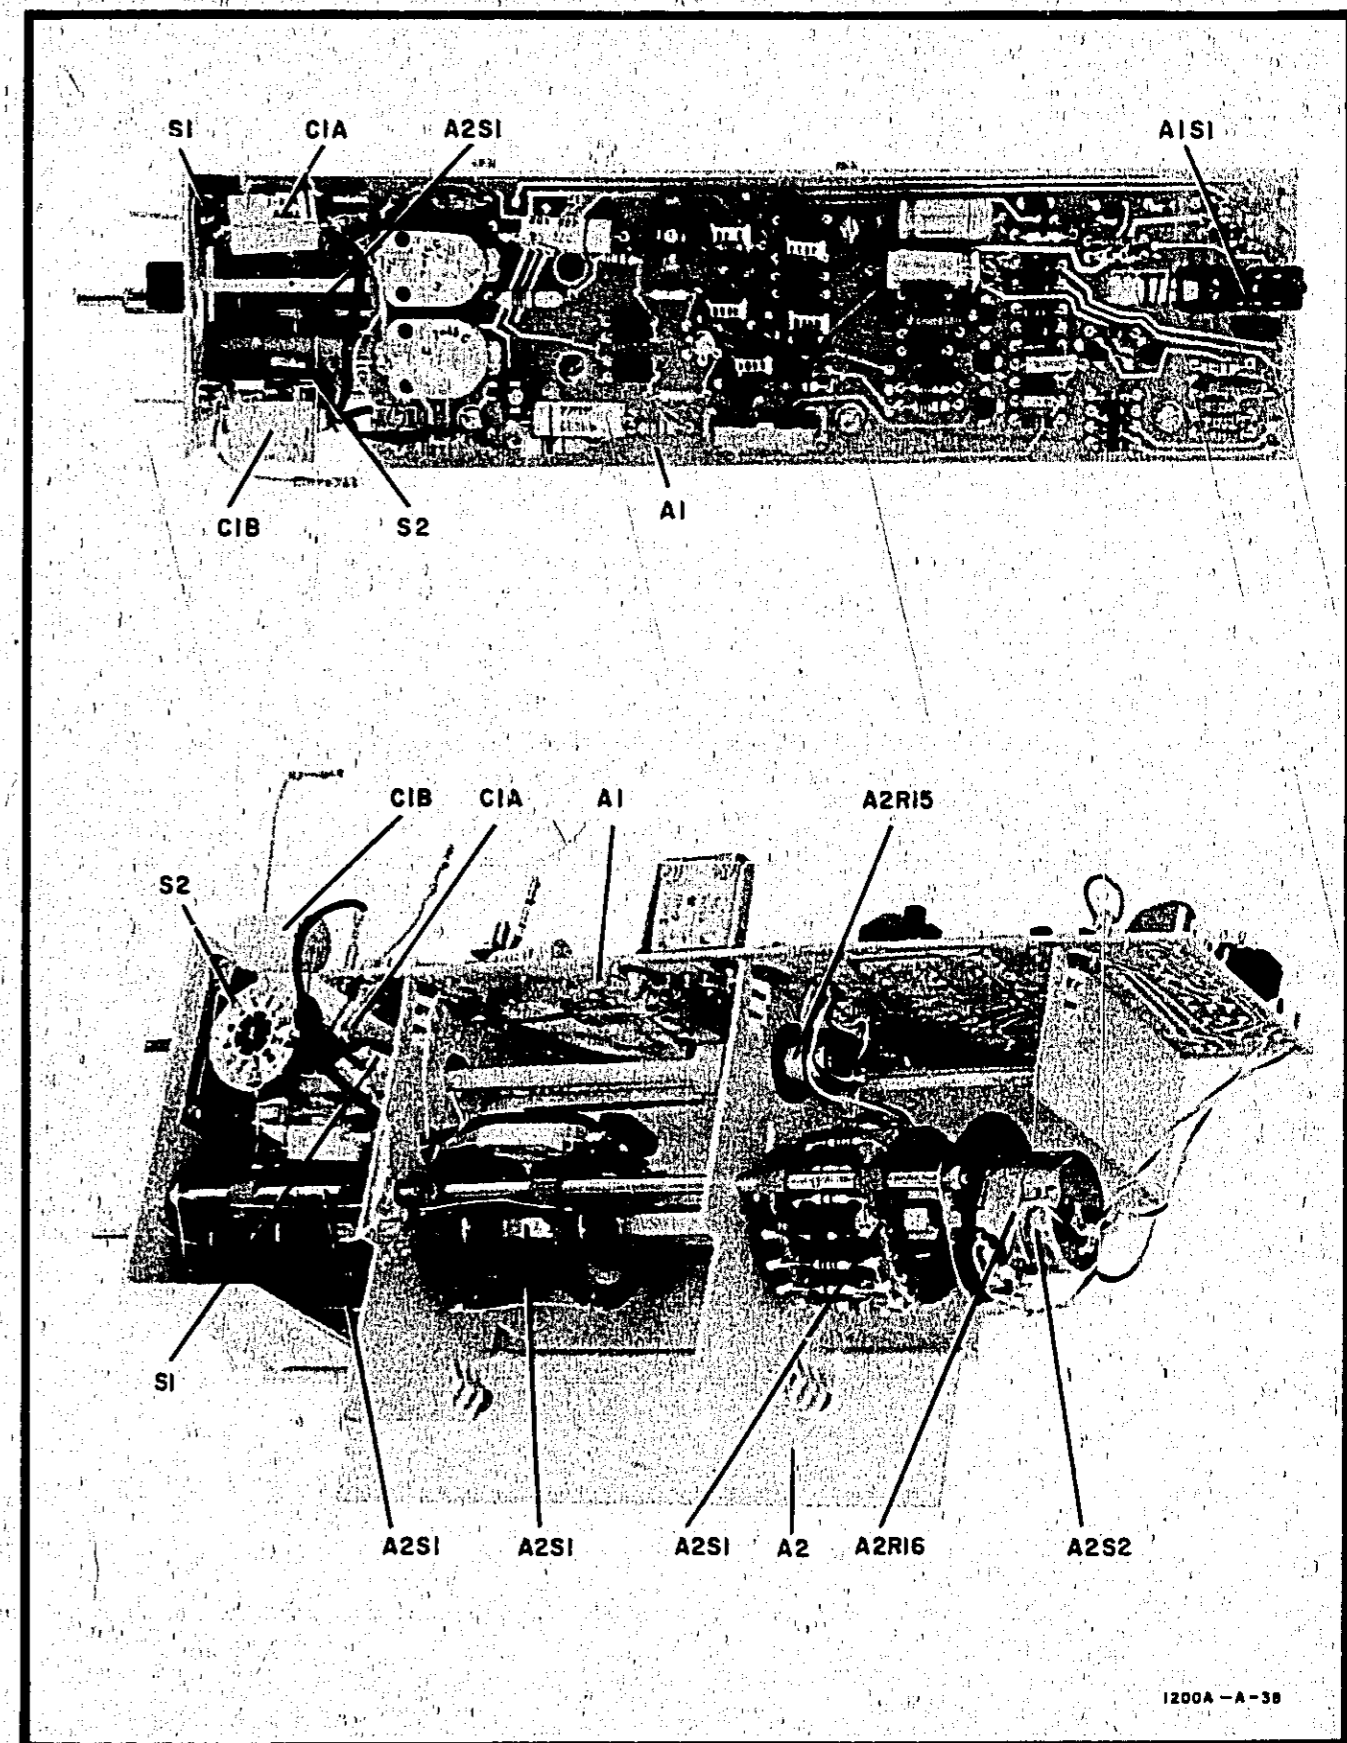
100 uV Preamp, 1A1, Assembly Locations
